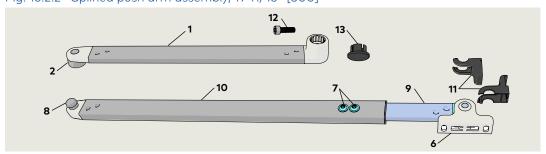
Splined push arm assembly, 19 11/16" [500]
